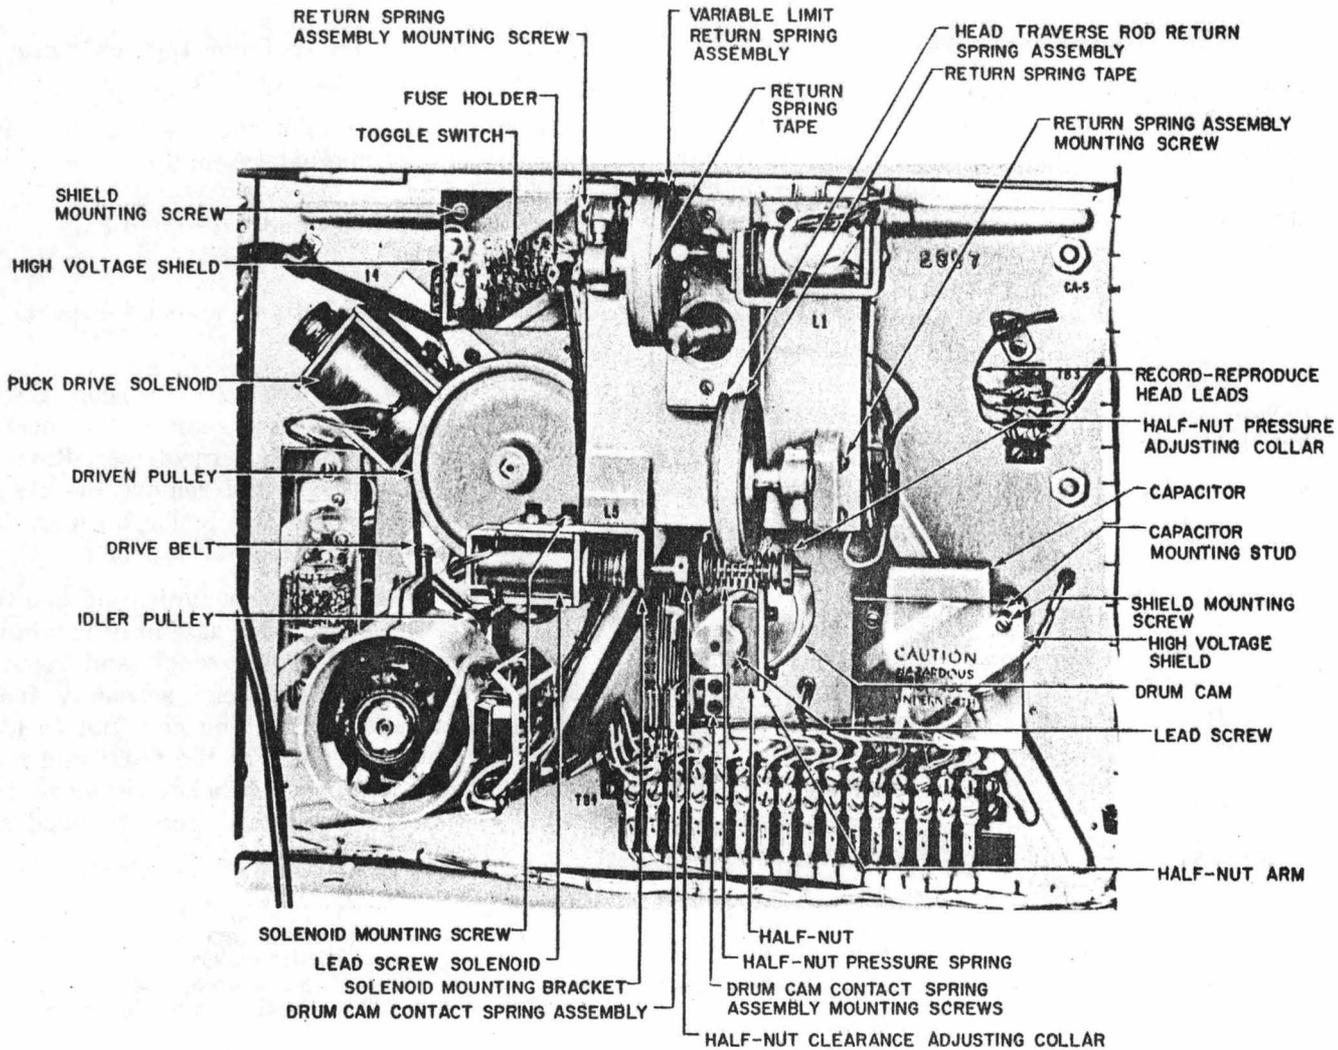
Recorder-Reproducer Mechanism — Rear View (Cover Removed)
